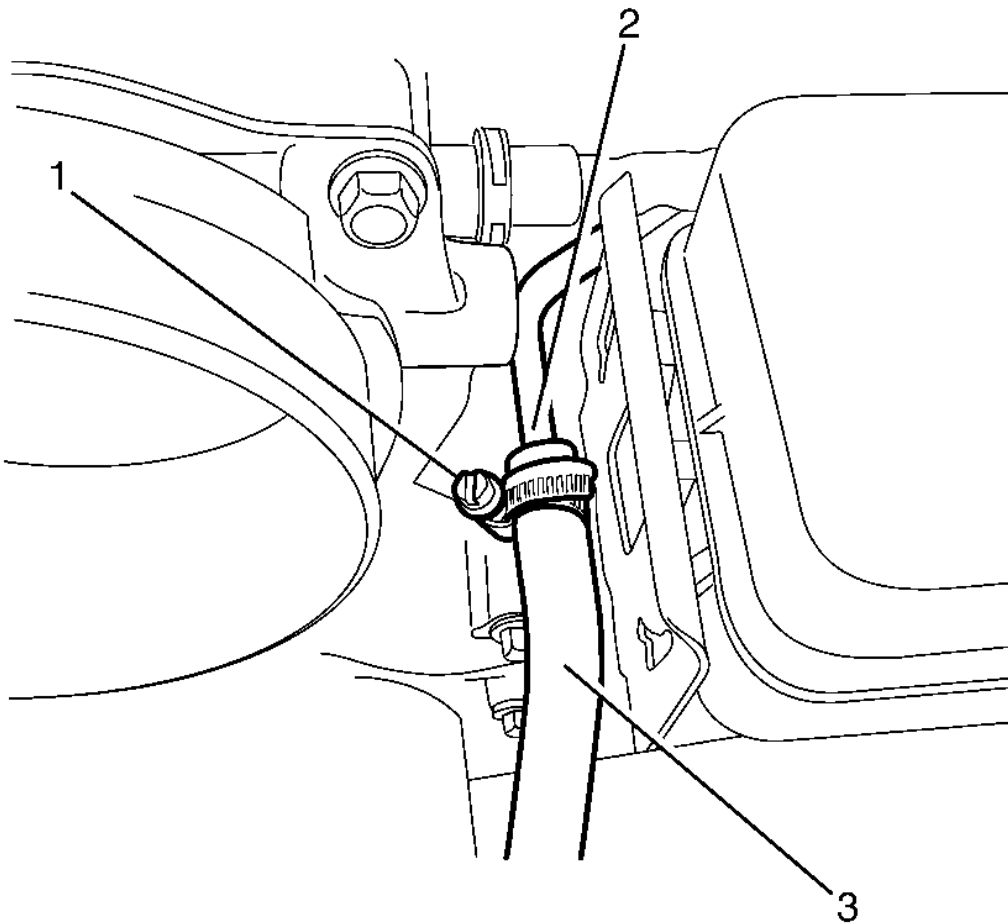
View Of Coolant Bleed Hose Retaining Clamp, Coolant Air Bleed Hose & Coolant Bleed Pipe
